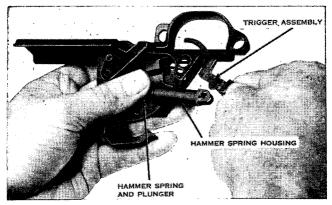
Removing the trigger assembly, hammer spring housing, hammer spring, and hammer spring plunger.
